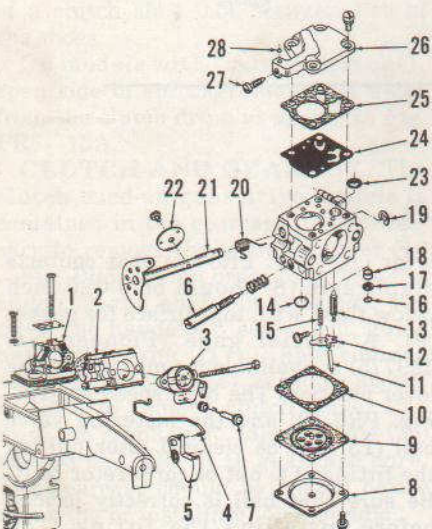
Exploded view of the Tillotson carburetor used on late models. The choke valve is contained in the blowback tube (3).
